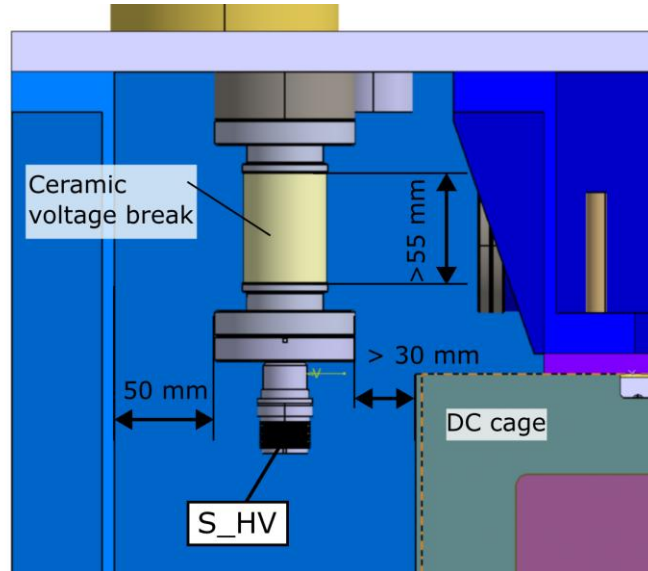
Section view of the S\_HV feedthrough assembly inside the cold stopping chamber
